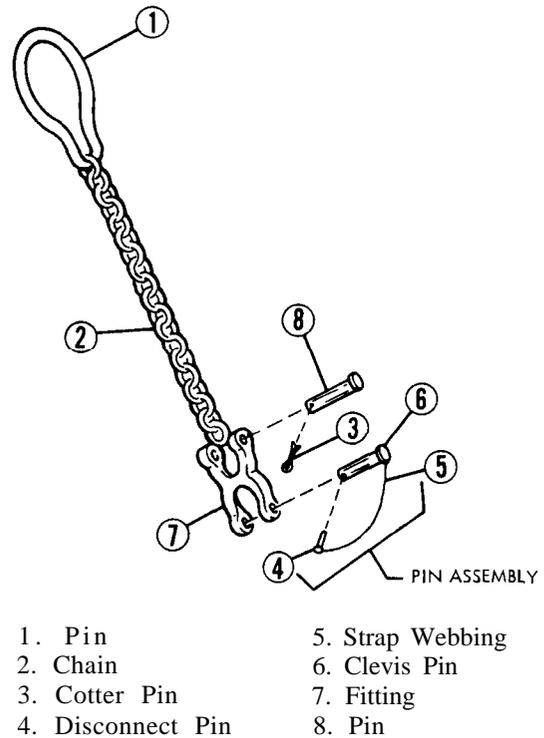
Chain Leg Assembly P/N 1670EG078B1.
